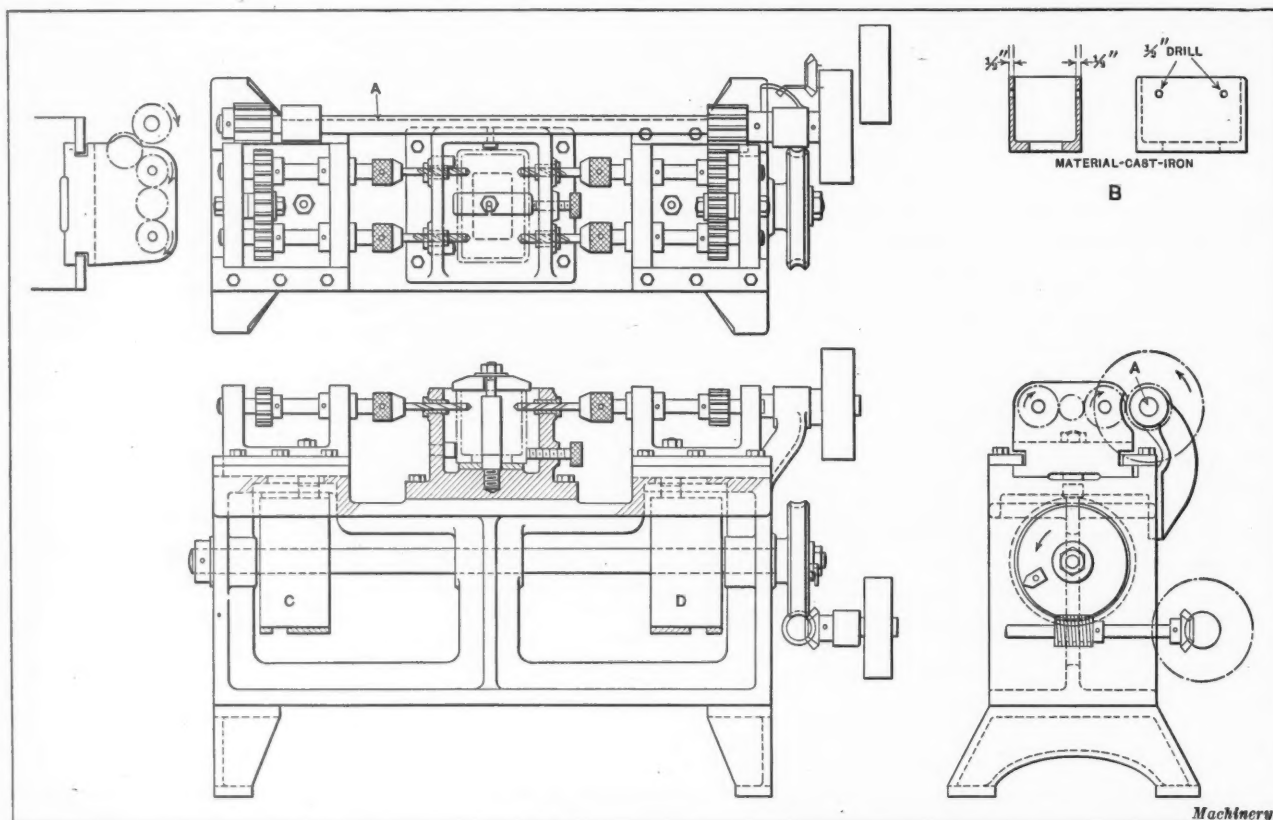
Special Opposed-spindle Horizontal Drilling Machine, with Cam-operated Tool-slides and Centrally Located Holding Jig
